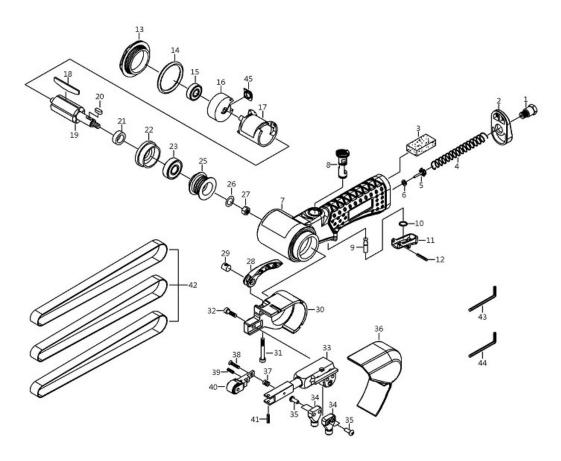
Spare parts drawing BS-C 10 PRO 15 VS
